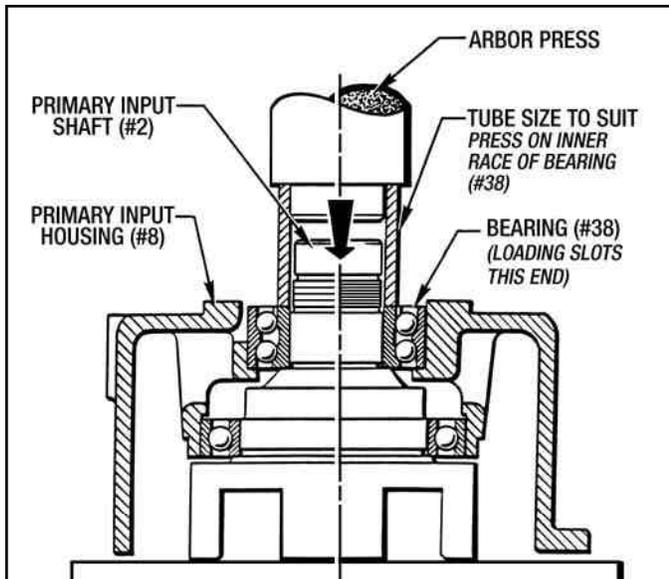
Installing Bearing (#38) Into Primary Input Housing (Quill Input Shaft)
